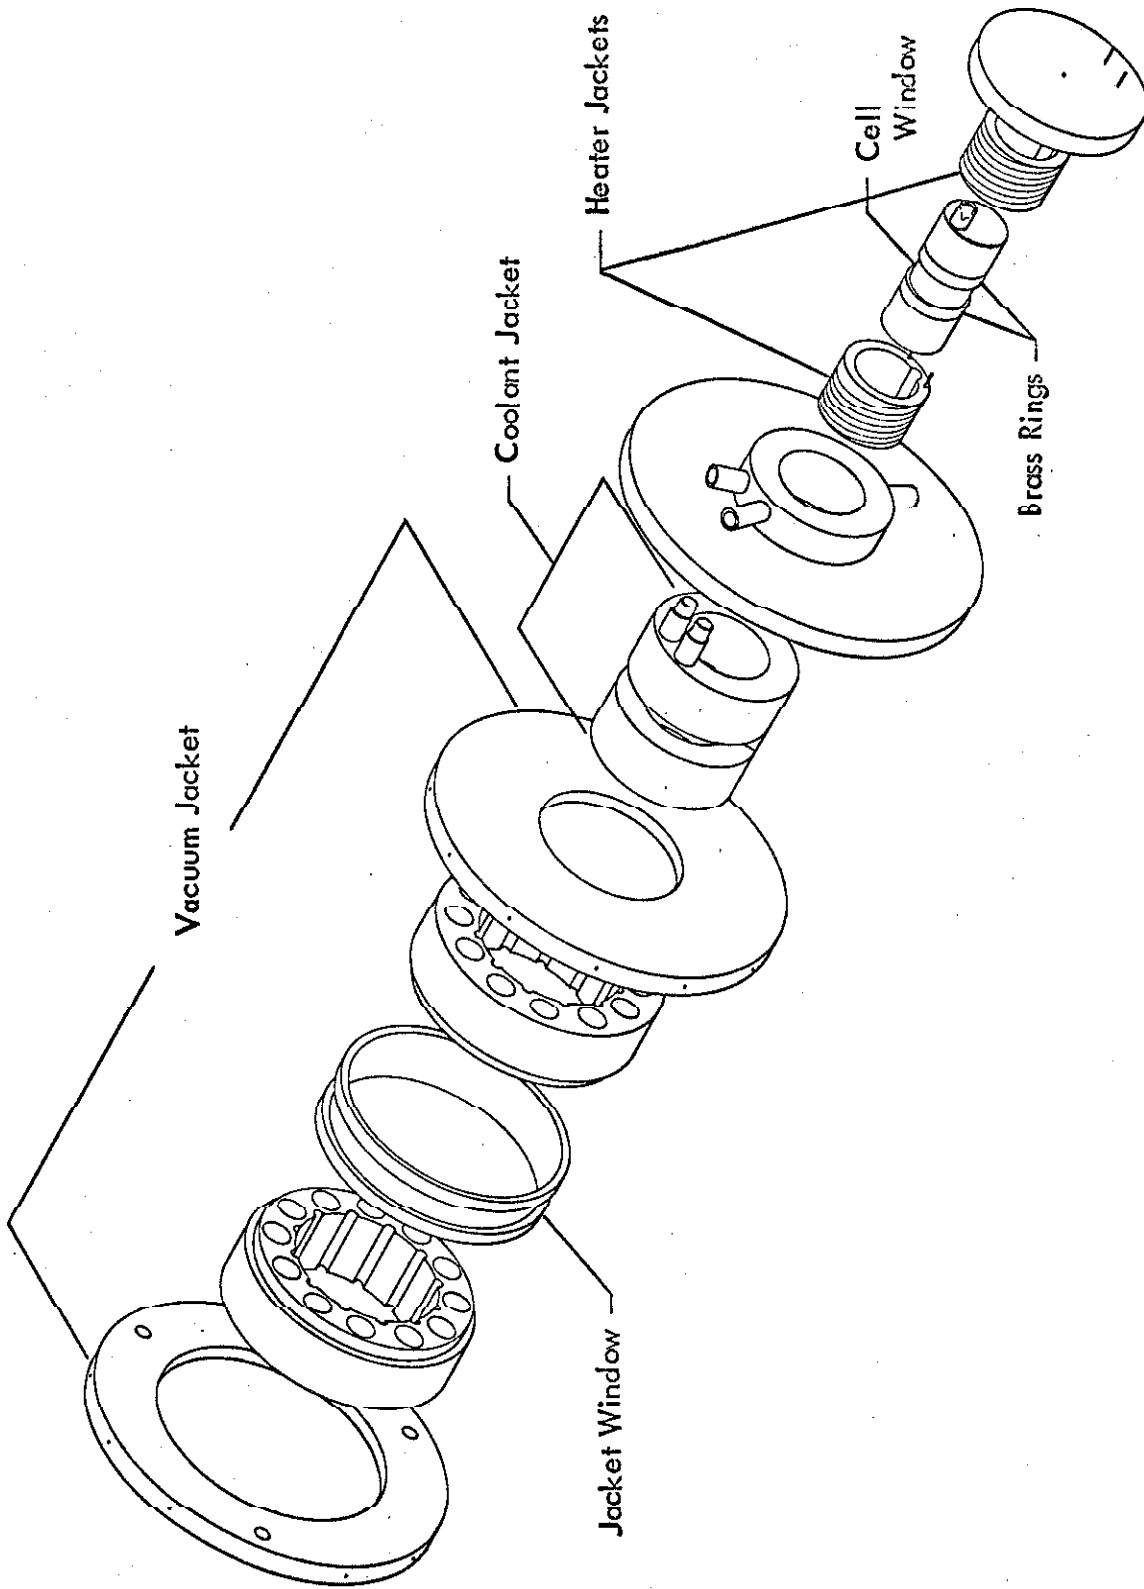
Exploded isometric view of sample cell and supporting jackets.
